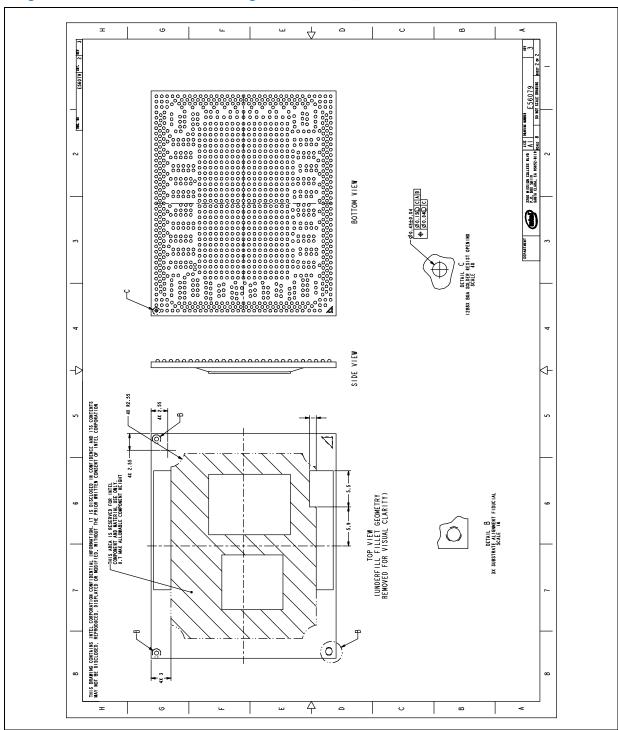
BGA Mechanical Package (Sheet 2 of 2)
